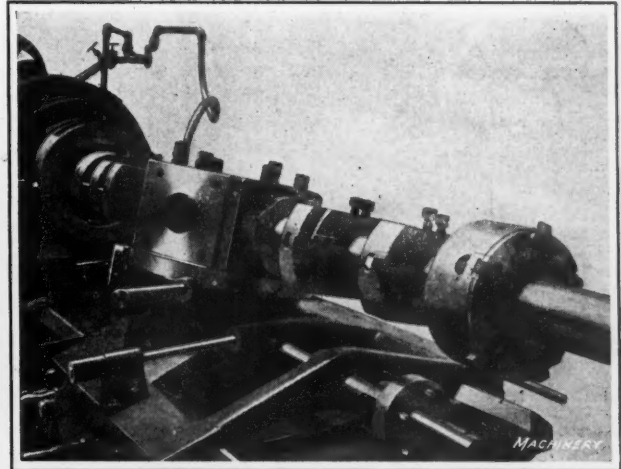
Fixture and Multiple Tool-head used in machining Work shown in Fig. 29
